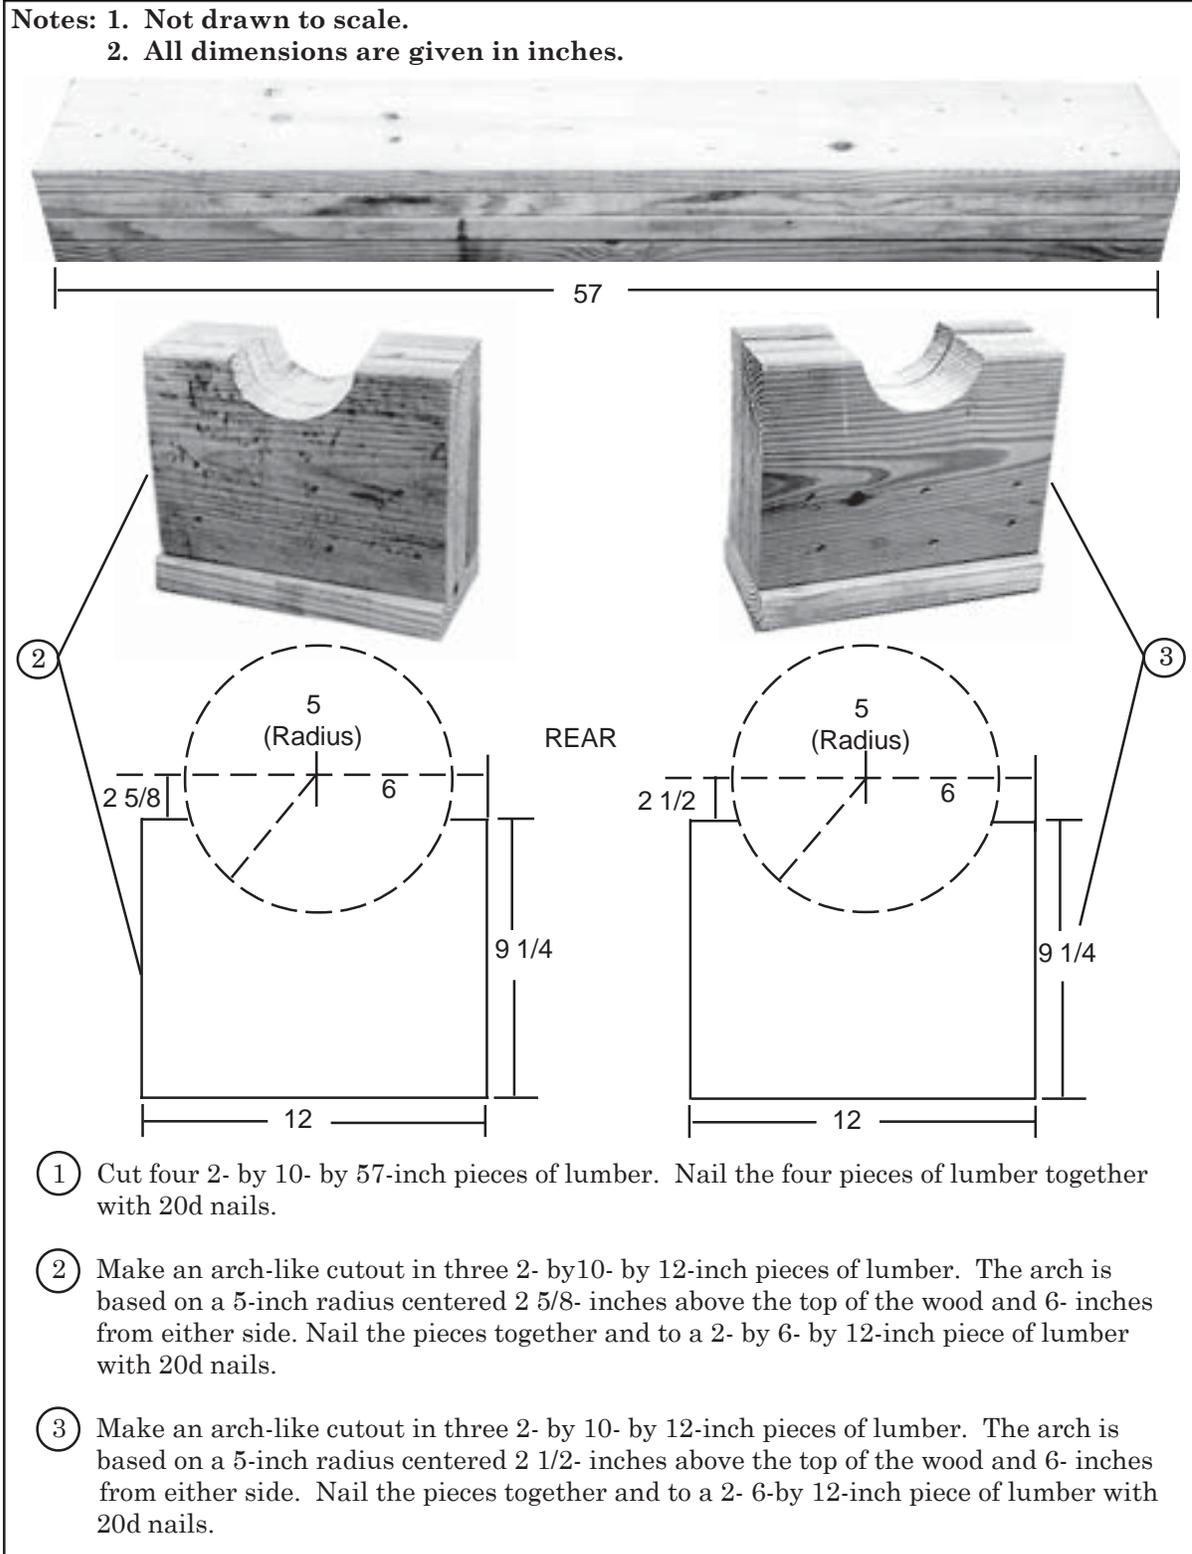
Front and Rear Gun Tube Support Blocks Constructed
